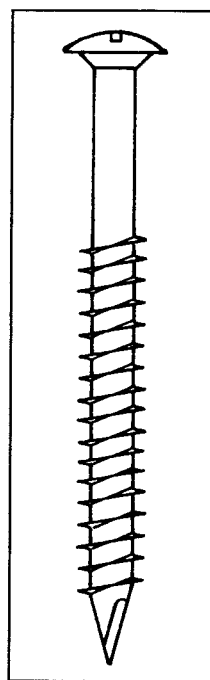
#14 diameter/10 threads per inch, slab point fastener
